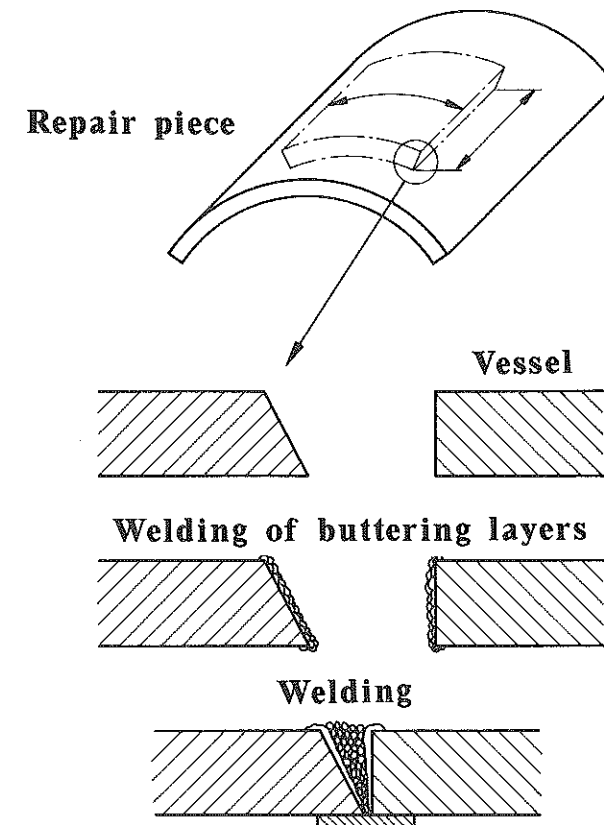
Repair welding procedure of the HC pressure vessel after the HC1 test with a repair piece removed from an identical sister vessel. Before welding an artificial axial flaw was produced into the repair piece
